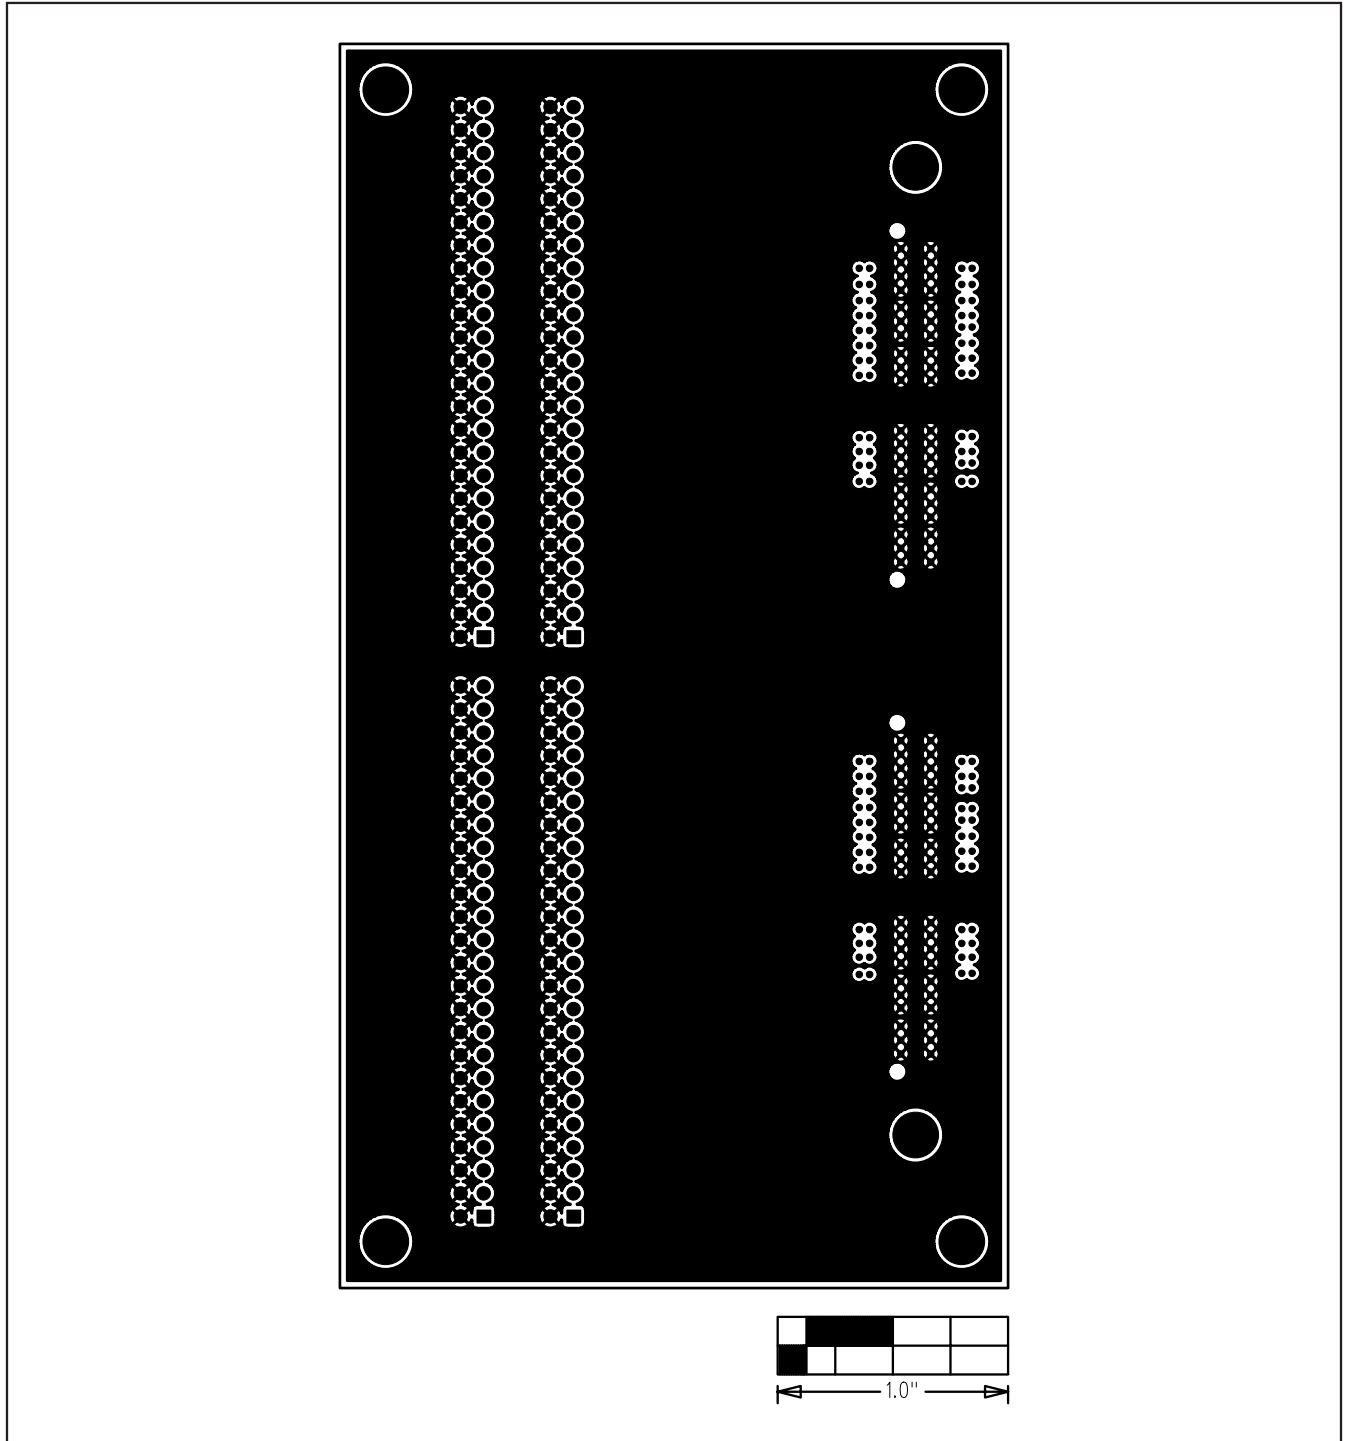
12-Bit LVDS Adapter Board Layout—Solder Side
